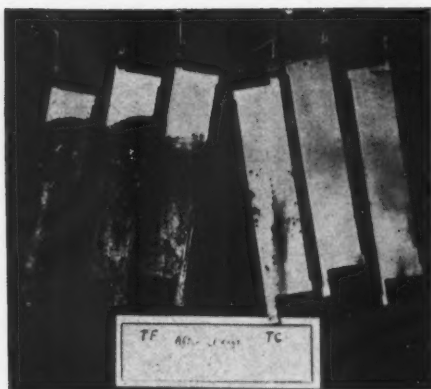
(right).—Chromium-diffused strips welded using 18/8 stainless rod. The mild-steel core has been dissolved in nitric acid leaving a "shell" of coating and weld metal.
